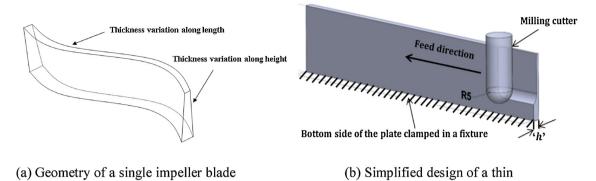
(a) and (b) Geometry of a single impeller blade and its simplified design used in this work.
